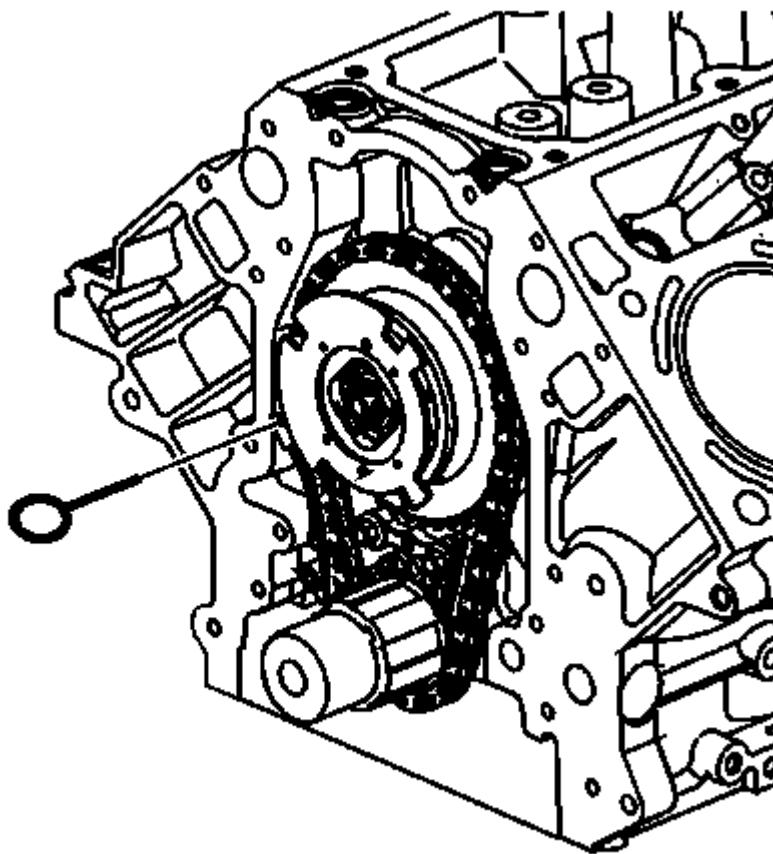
View Of CMP Actuator Solenoid Valve
